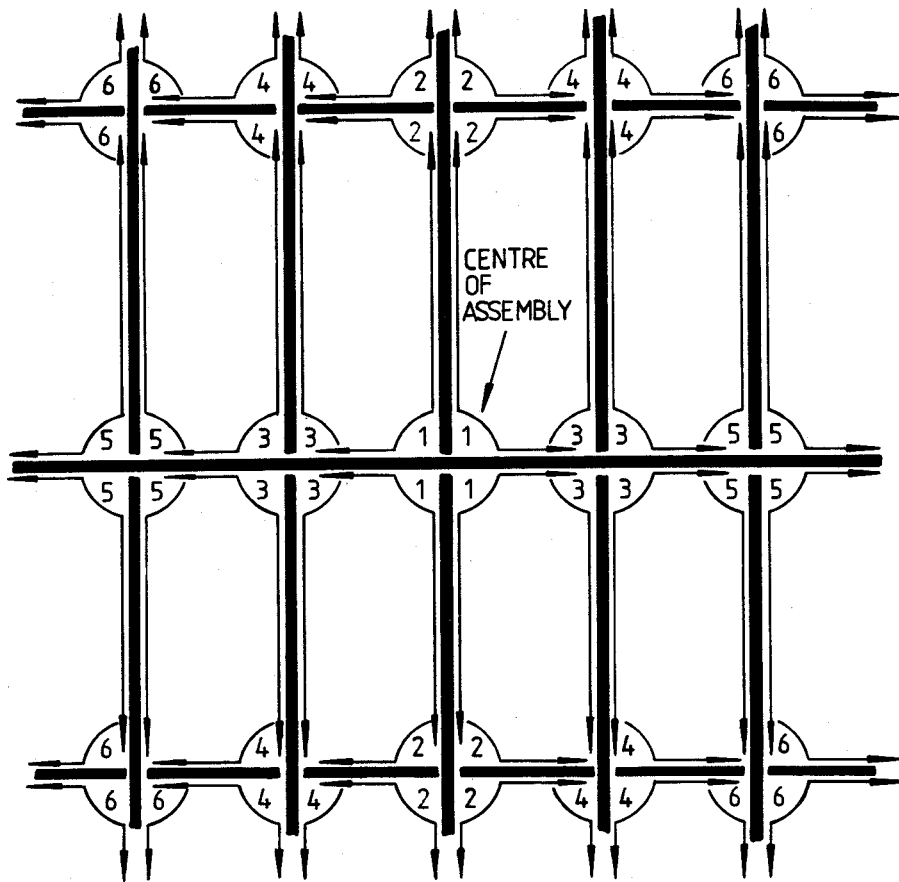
SEQUENCE FOR WELDING STIFFENERS TO PLATING
